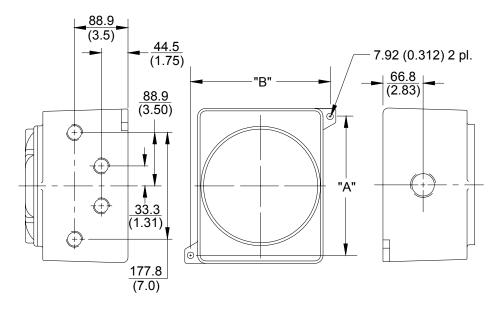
72342, BA72342, CA72342 Four-unit explosion proof housing
